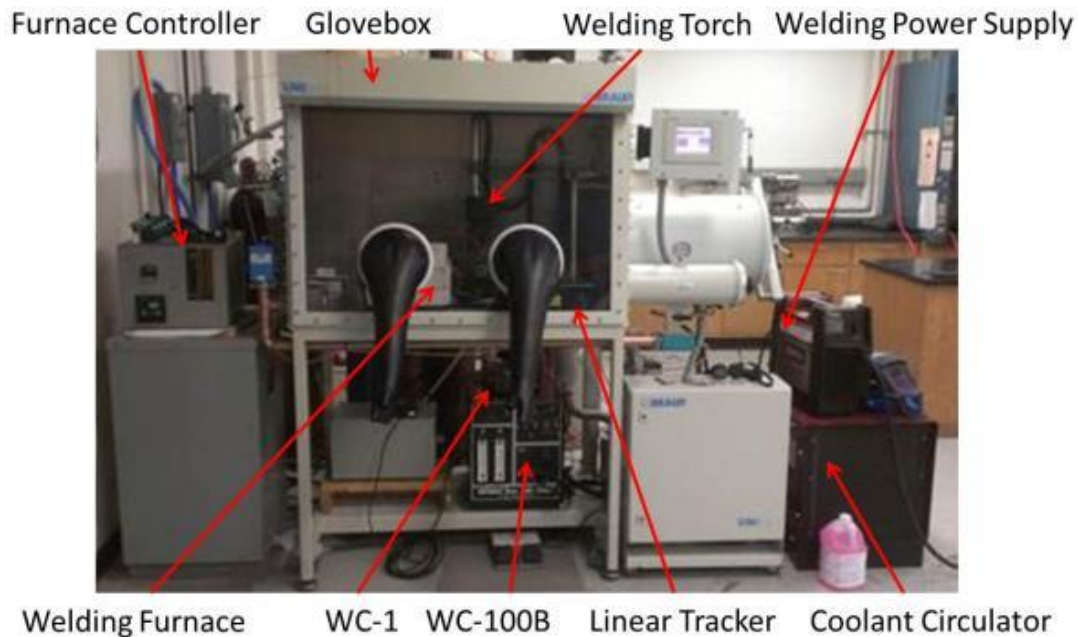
Welding chamber and equipment necessary for PAW of UHTCs.
